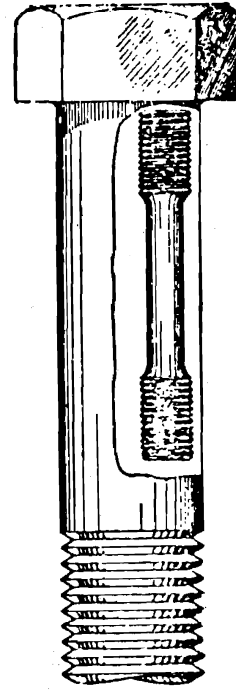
Location of Standard Round 2-in. Gage Length Tension Test Specimen When Turned from Large Size Bolt.
